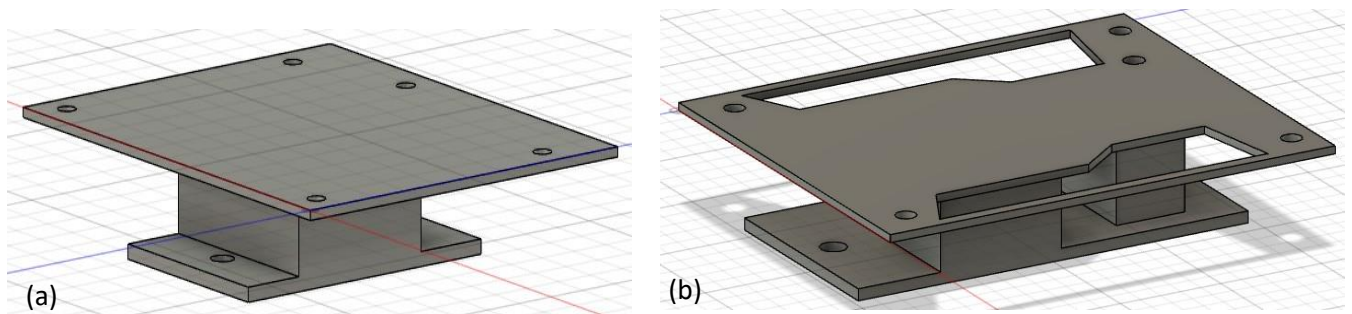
3D designs of the bottom part of the shielded enclosure. (a) previously designed part. (b) the modified part.
